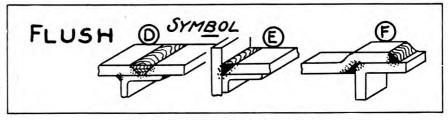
FLUSH TYPE OF ELECTRIC WELD
